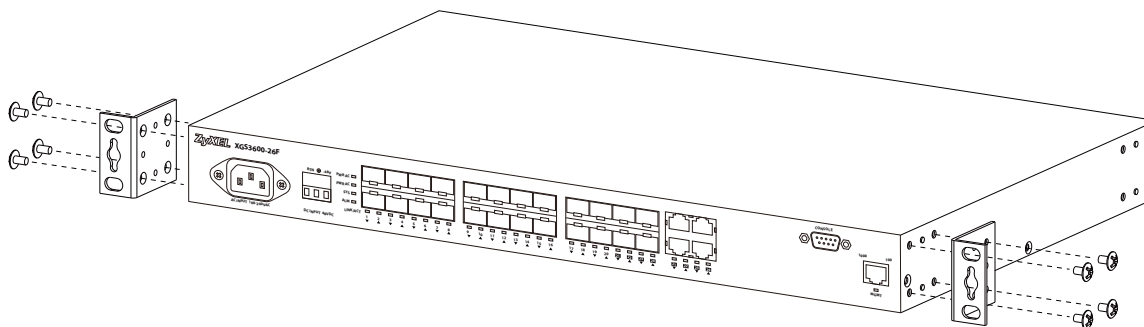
MGS3600-24F/XGS3600-26F/XGS3600-28F Attaching the Mounting Brackets
